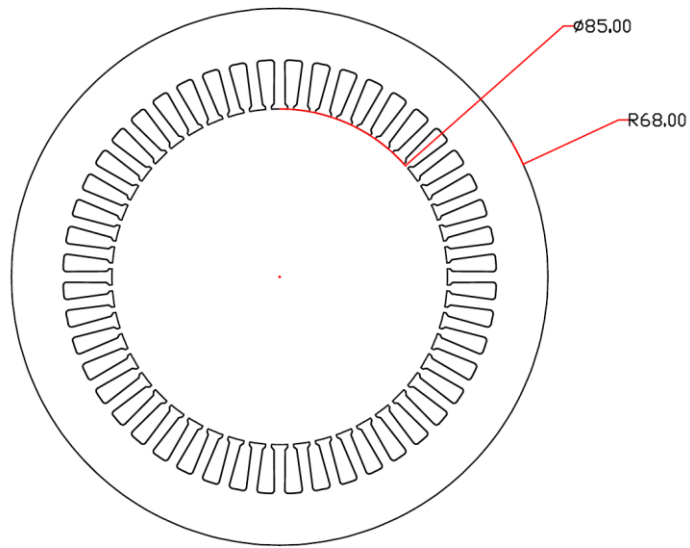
Stator lamination dimensions of the prototype machine.
